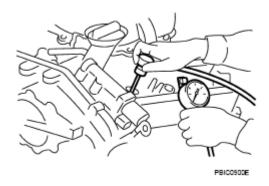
Installing Compression Gauge With Adapter Onto Spark Plug Hole Courtesy of NISSAN MOTOR CO., U.S.A.
